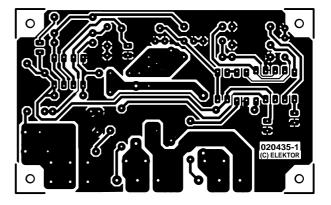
Copper track layout and component mounting plan of the PCB designed for the project. The board is single-sided and available ready-made through Readers Services.
